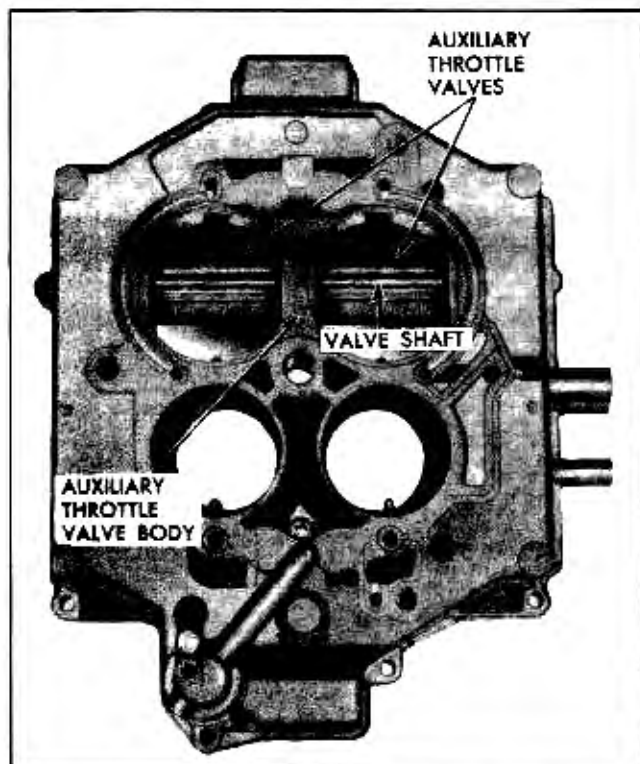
B-54 Auxiliary Throttle Valve Body Installed
